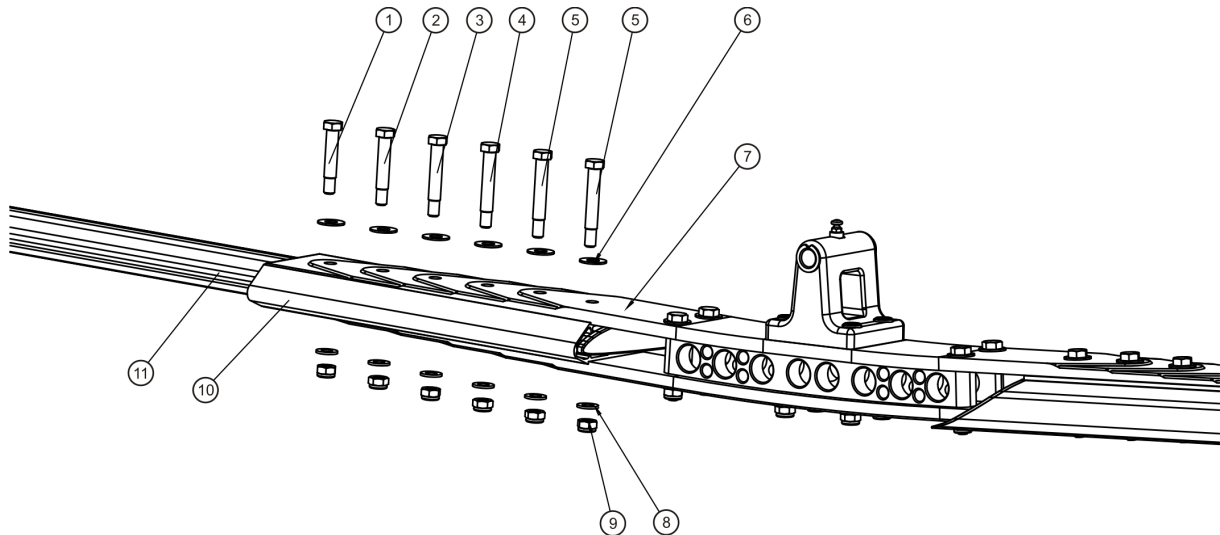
Disassembly rotor - teetering parts (Effectivity: RS II)
